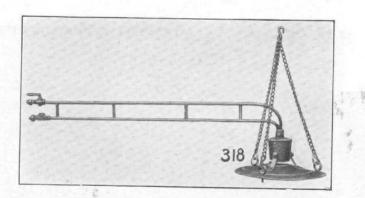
Hauck ladle heating burner with deflecting plate for heating large ladles. It is operated with compressed air and any grade of crude, fuel, or kerosene oil. The fittings on this burner will fit any Hauck compressed air type tank. Price complete \$.....
